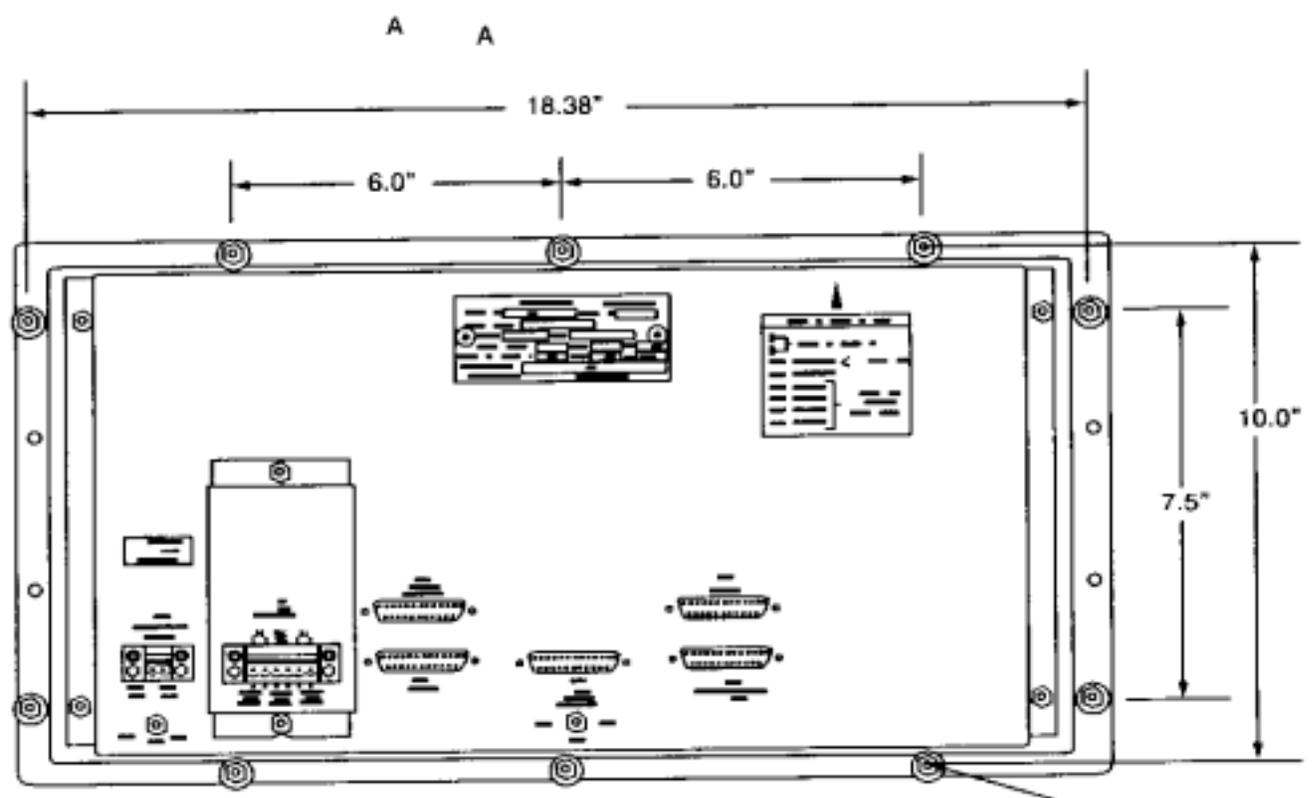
Panel Mount SmartLink Remote I/O PCB
